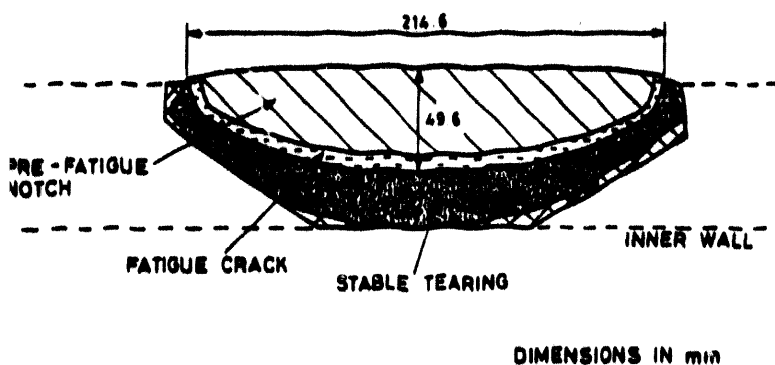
THE COLD WELD REPAIR VESSEL FRACTURE SURFACE
